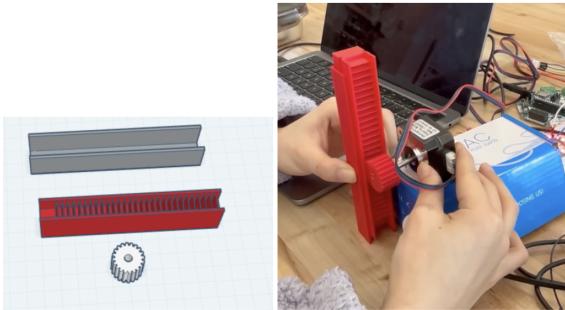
Rack and pinion CAD model (left) and stepper motor test with rack prototype (right)
